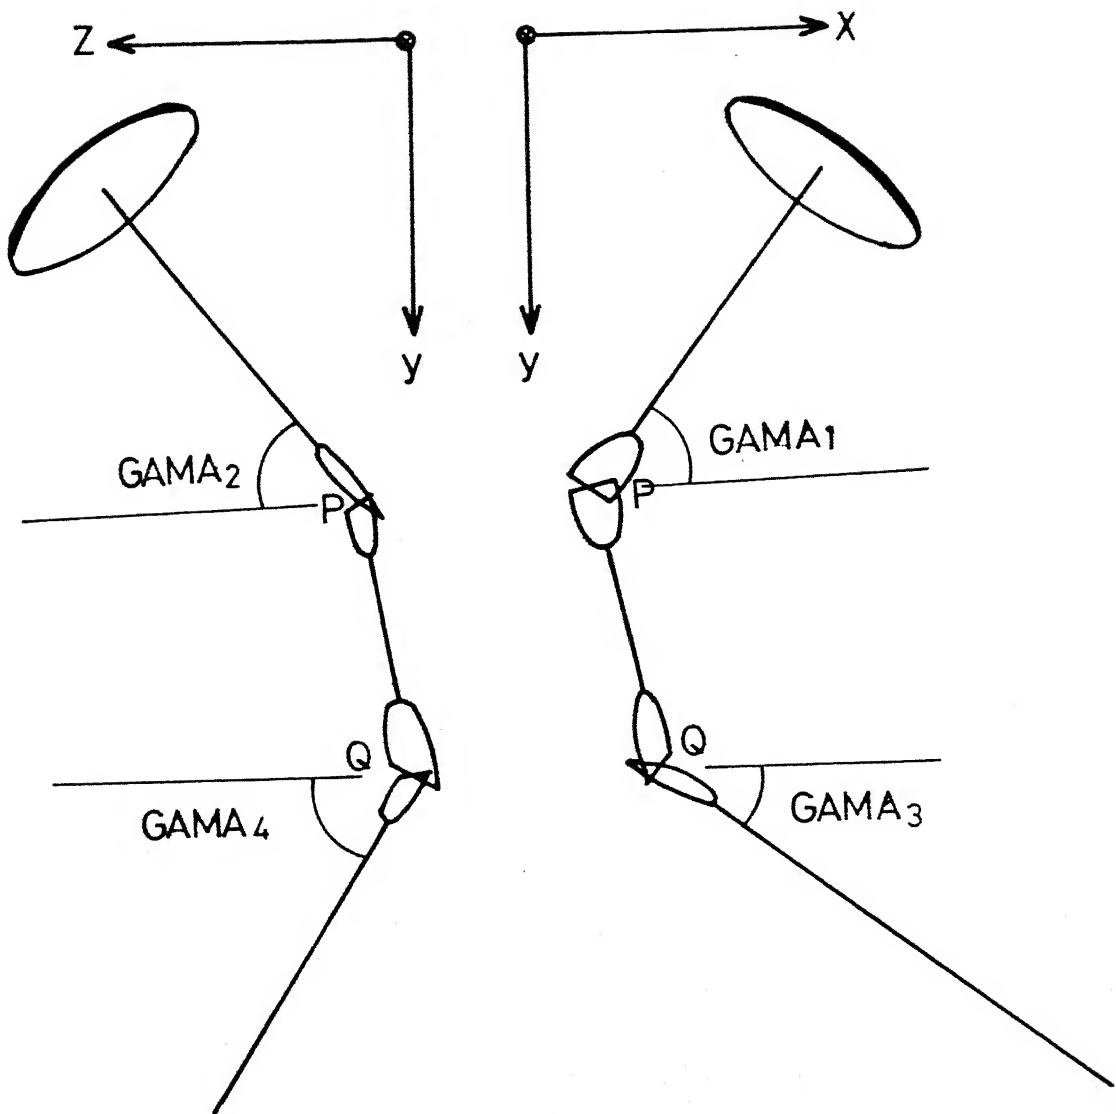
Part of steering system from steering wheel to steering gear box.
